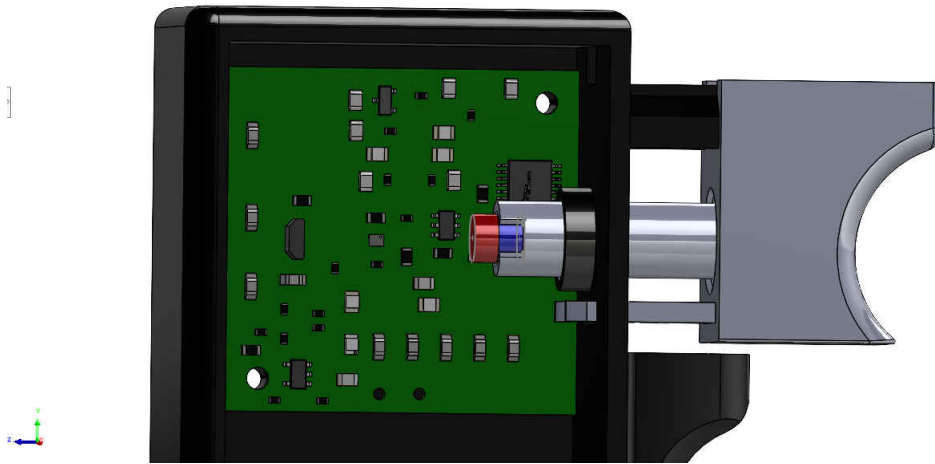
Board Picture Within 3D Printed Trigger Module
